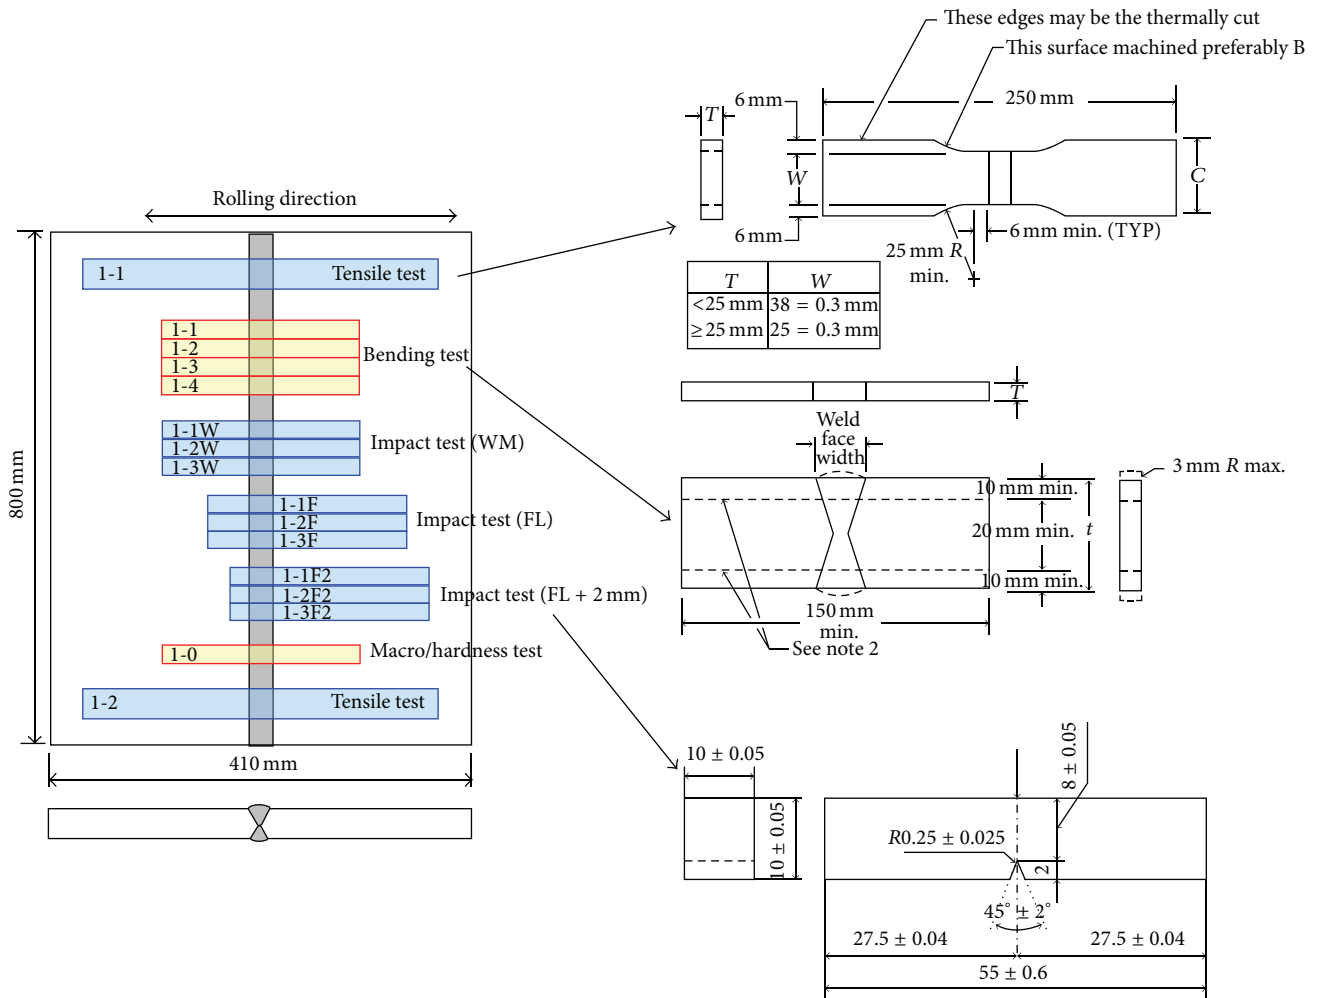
Welding specimen collection drawing and their shape.
